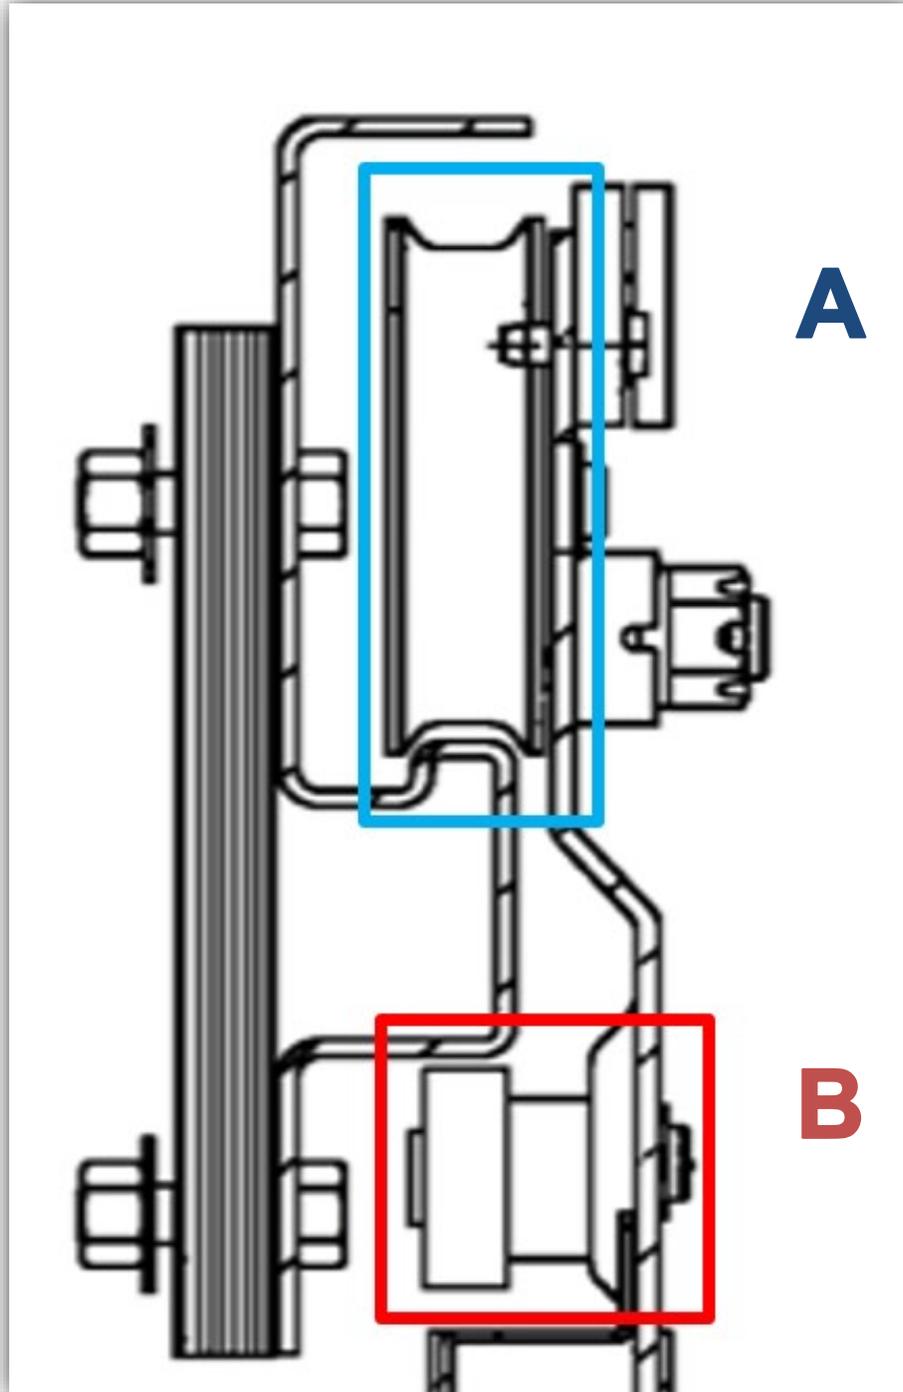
Example of a car door track system. [A] Roller on top rail. [B] Eccentric adjustable roller on bottom of rail.
